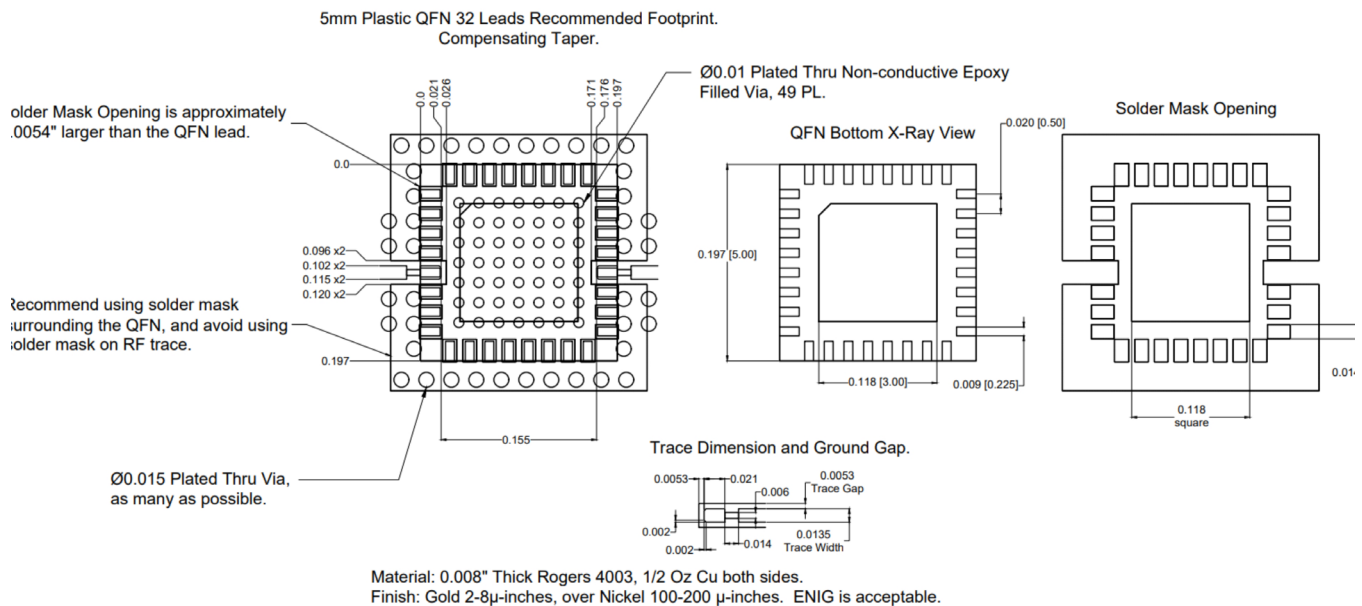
MFBC-00016PSM bandpass filter footprint drawing.
